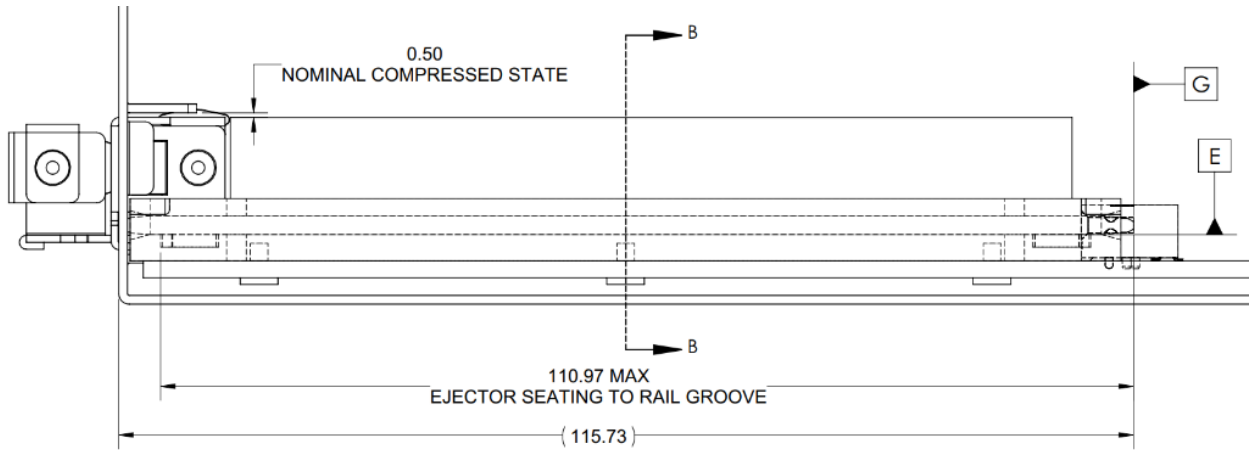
SFF Baseboard Chassis CTF Dimensions (Rear Rail Guide View)
